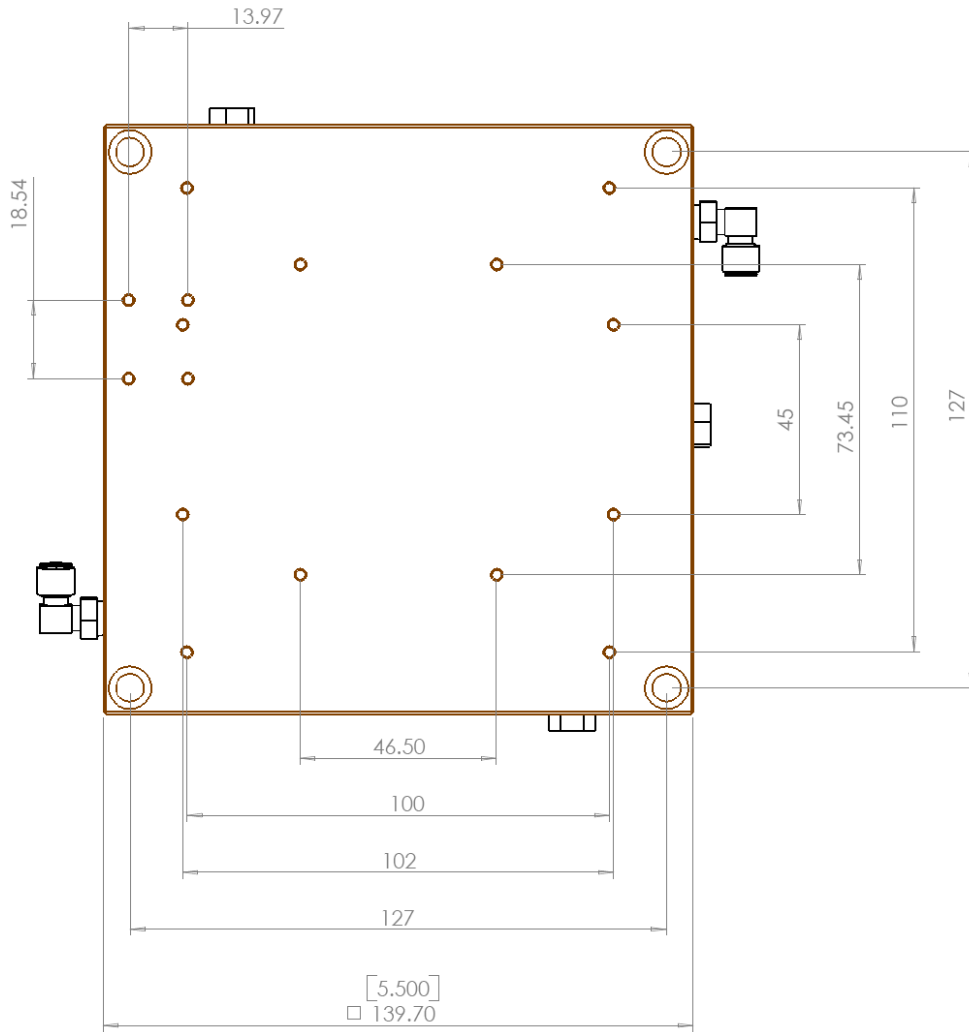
Outline dimensions of WP-02 (Dimensions in mm)
